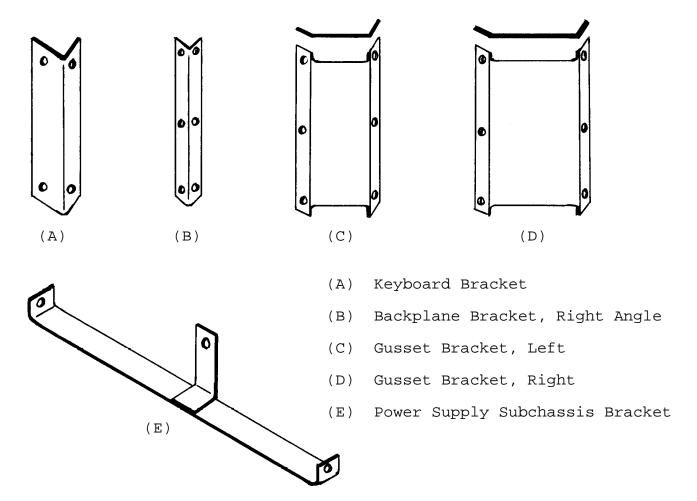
Brackets used in Sol cabinet-chassis assembly.
